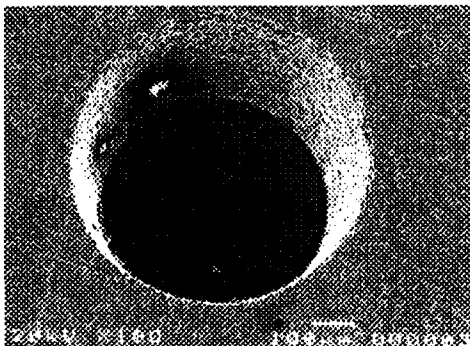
SEM Photograph of machined holes (t = 0.3 mm)
